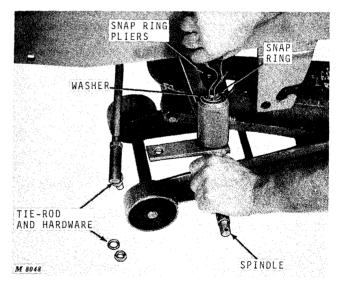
Installing Front Axle, Spindles and Front Wheels
